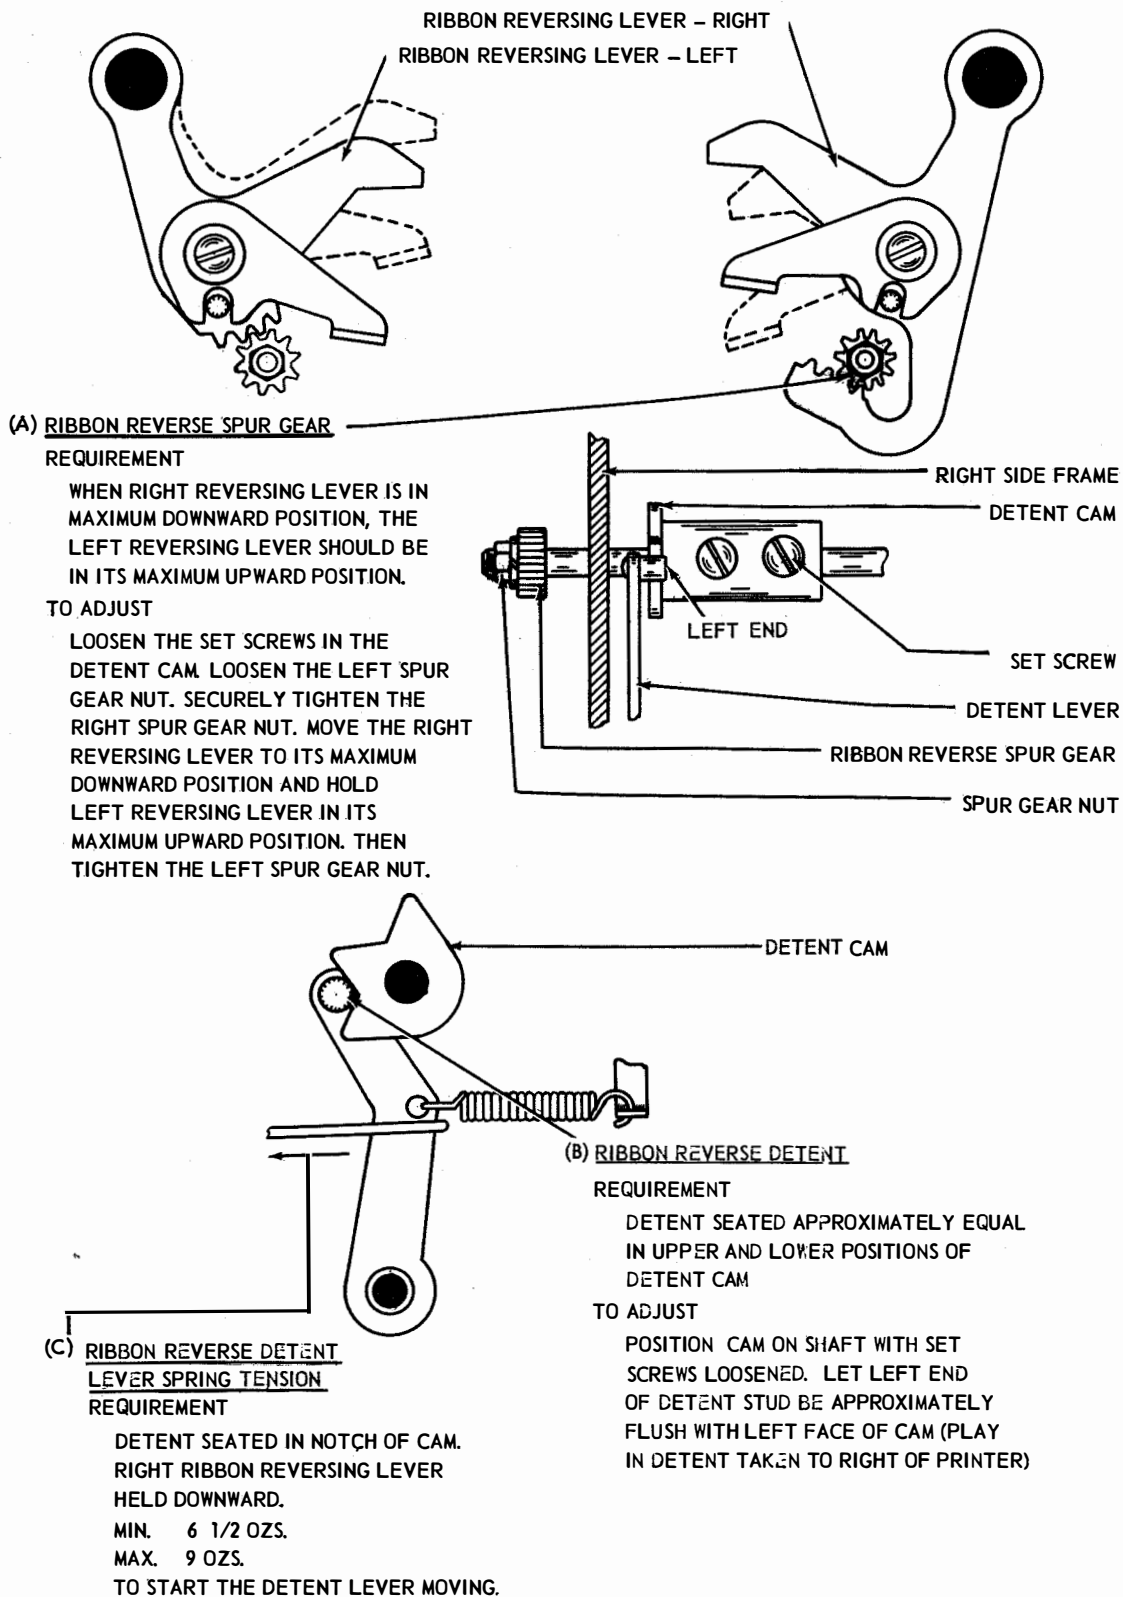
TYPING UNIT, RIBBON REVERSE MECHANISM
